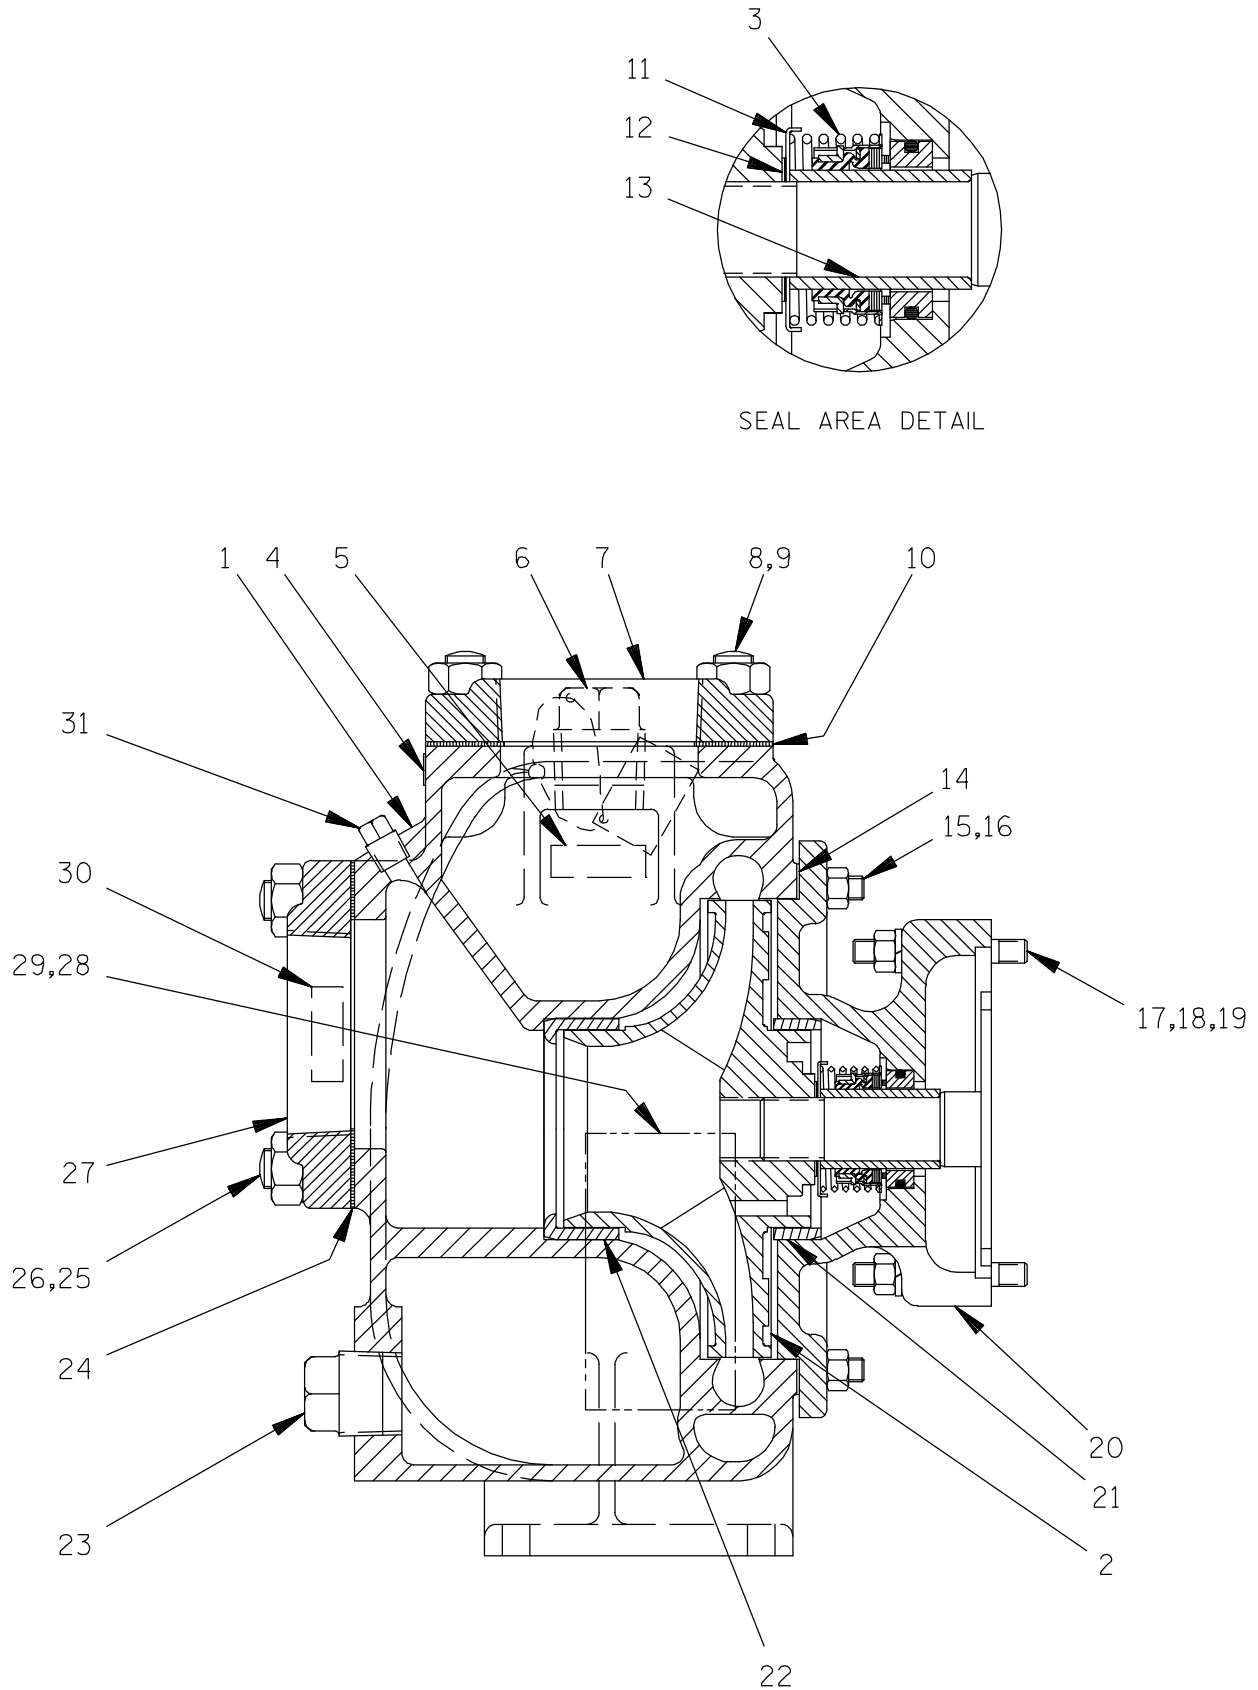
Pump End Assembly 03H1-(GX390) PPO
